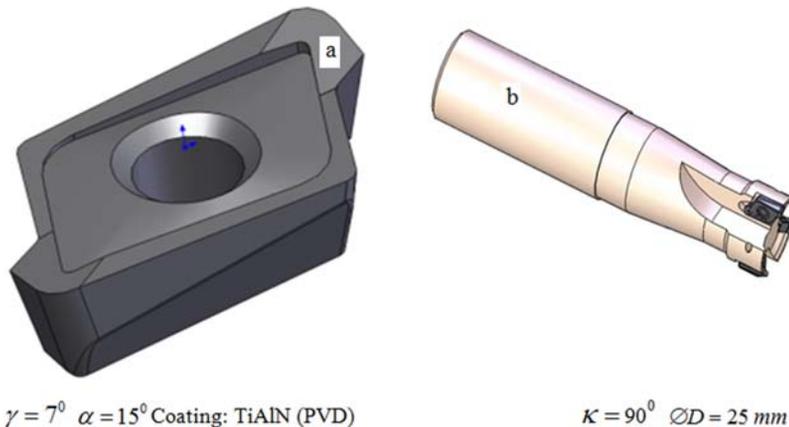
Form and dimensions of the cutting insert used in the experiments (a), tool holder (b).
